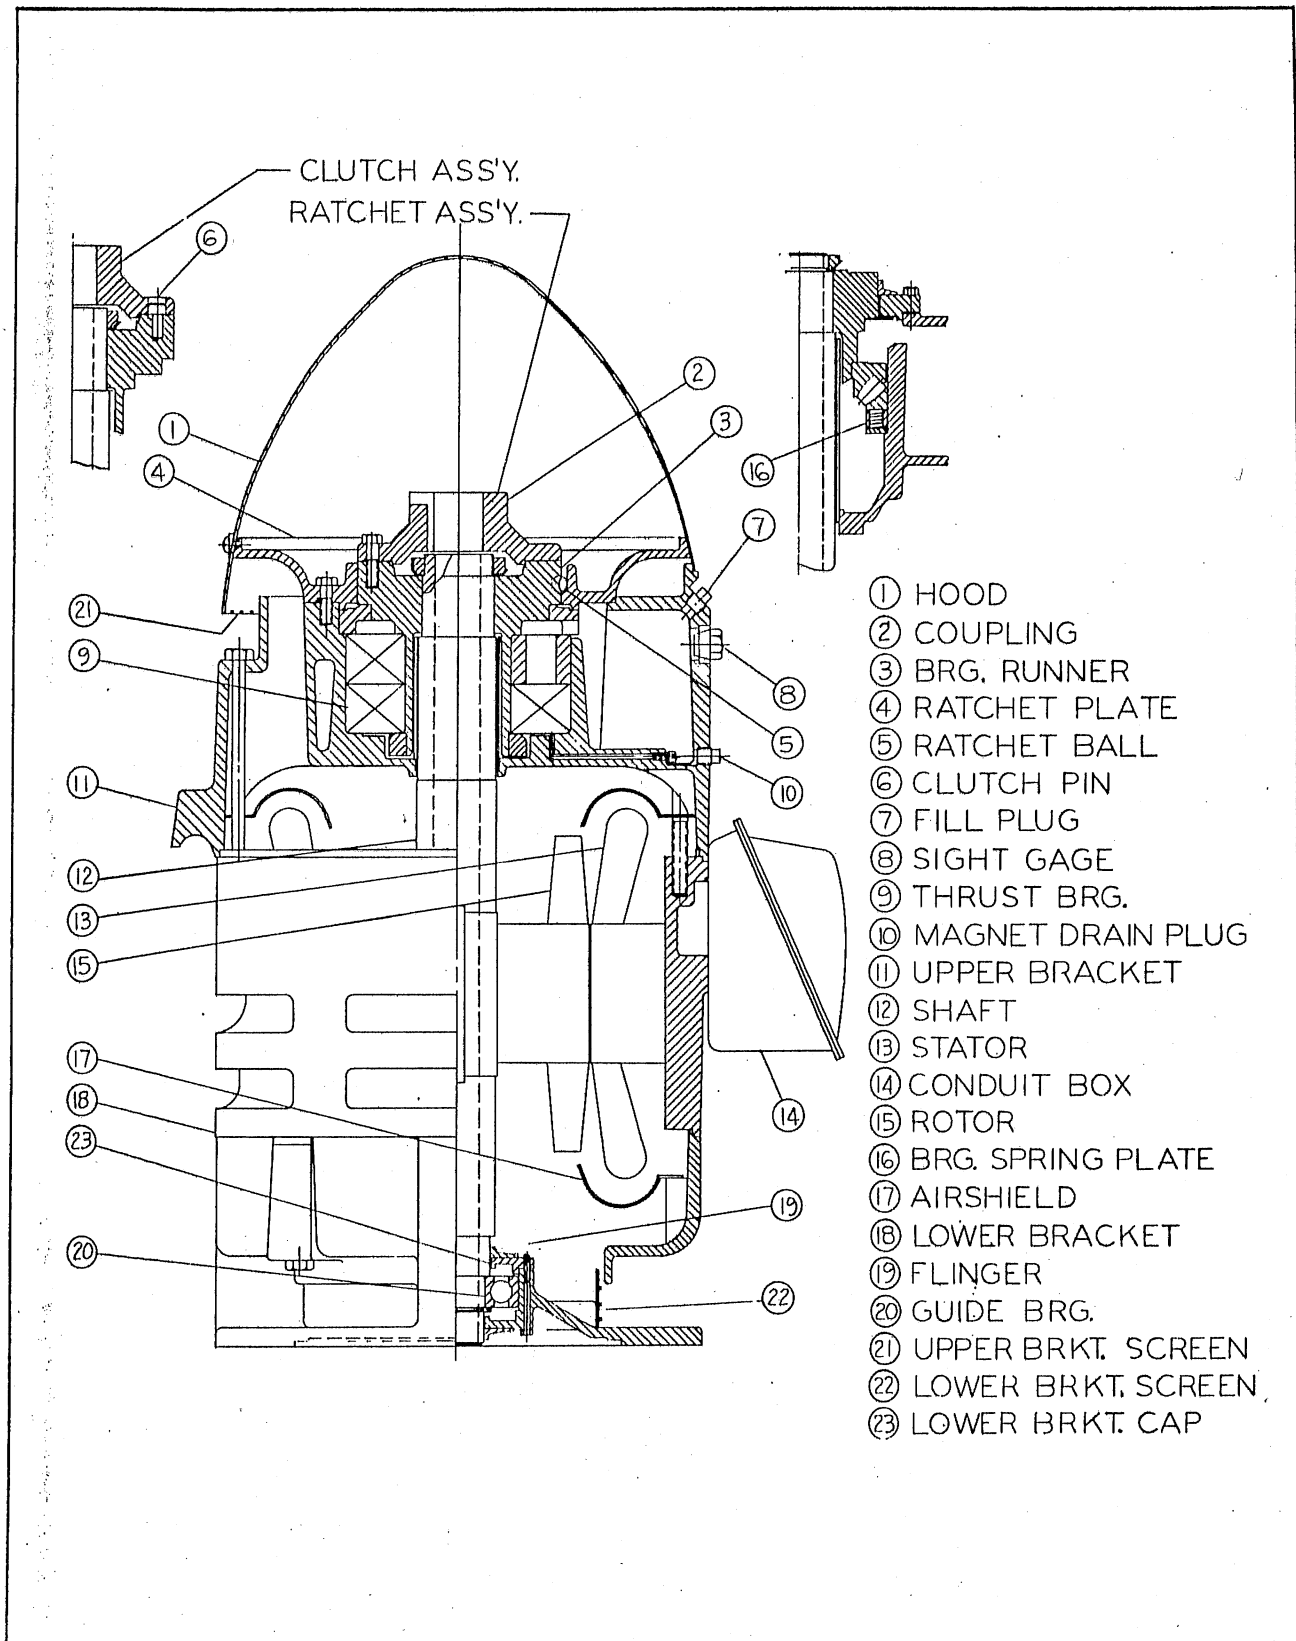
Vertical Hollow Shaft Type ADDP-LLA Frames 324-445-U (Solid Shaft Motors Use Same Construction Except Top Coupling is Omitted)
